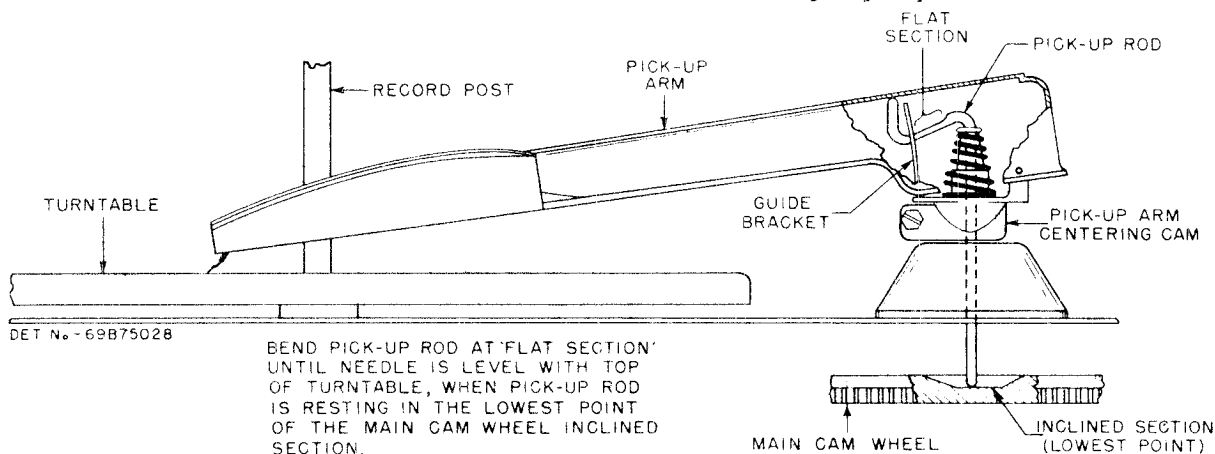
PICK-UP ARM VERTICAL ADJUSTMENT DETAIL
